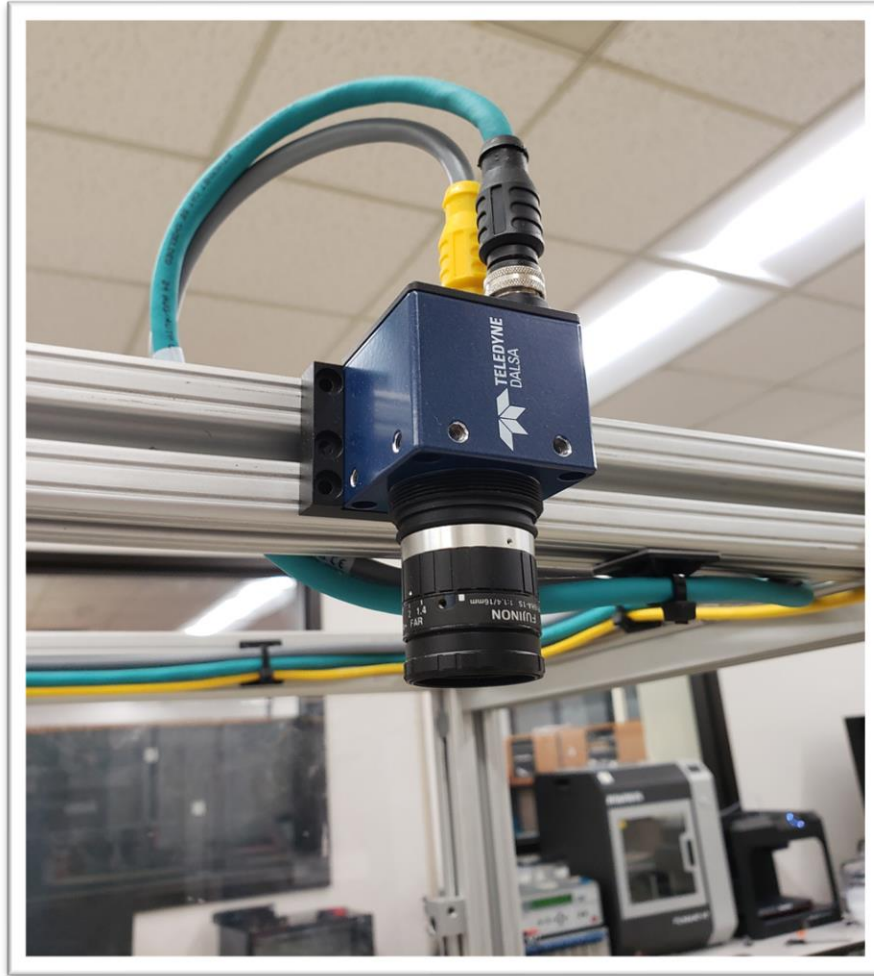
Teledyne Dalsa inspection camera located on top of the inspection fixture.
